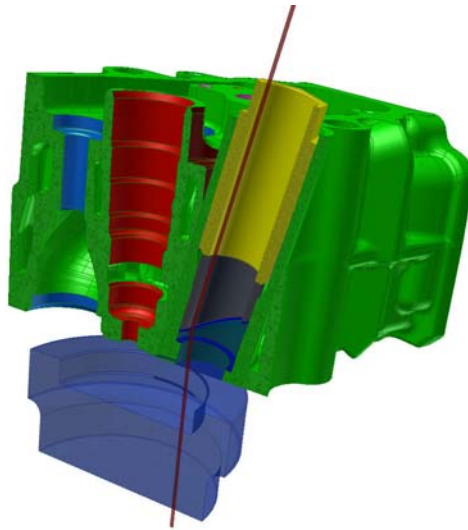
3D cut of the 3-valve cylinderhead design. The insert is represented in yellow; the red socket is the location of the injector.
